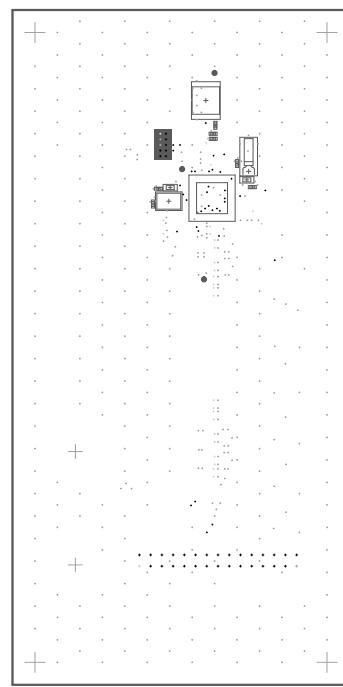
Embedded capacitance 4-layer design, mechanical drawing bottom.
